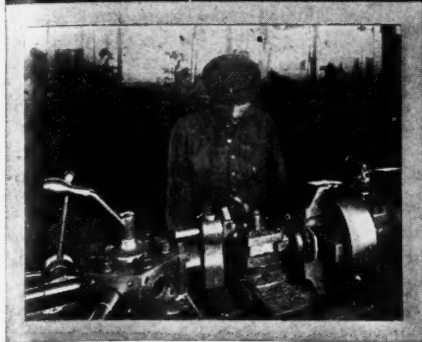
Procedure followed in checking the Teeth of Gears and Pinions with Fixture shown in Figs. 1 and 2
